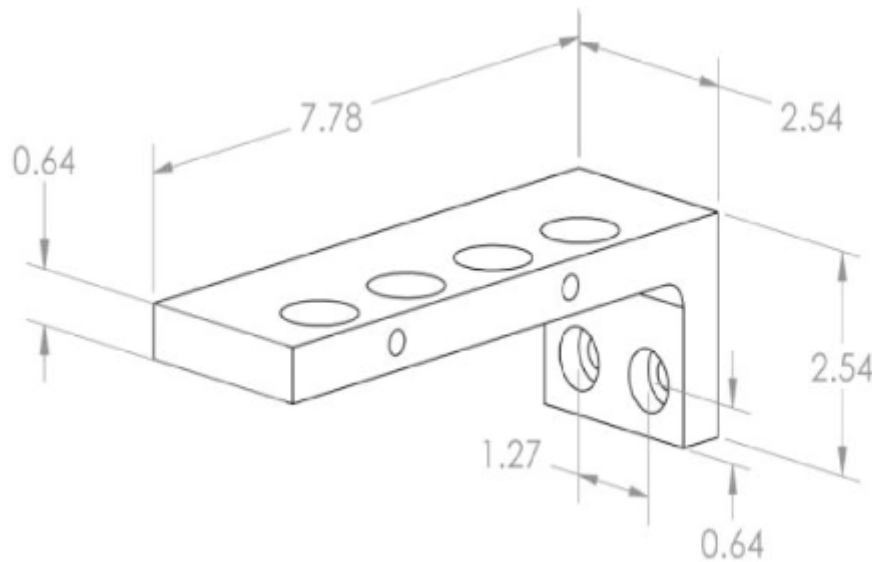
An overall dimensional drawing (in cm) for the cantilever bracket
